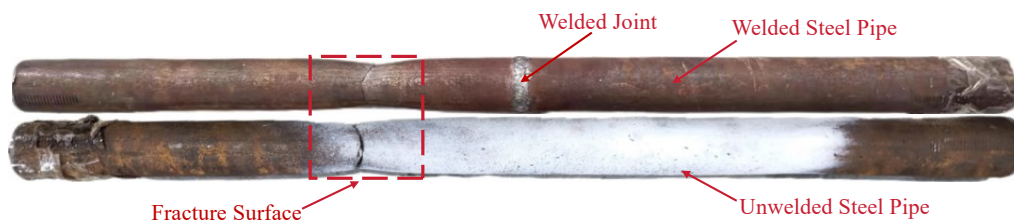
Failure morphology of unwelded and welded steel Ttubes
